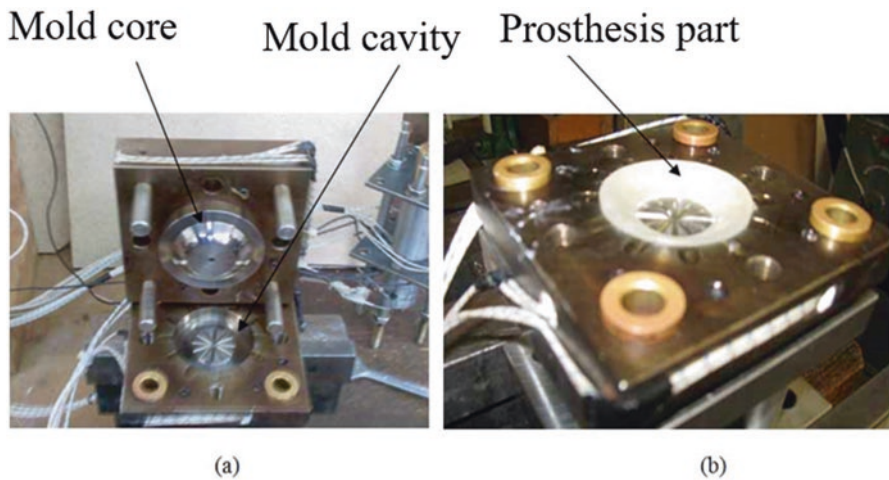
The mold for fabricating the complete meniscal prosthesis (a) the mold core and cavity (b) the complete meniscal prosthesis within its mold
